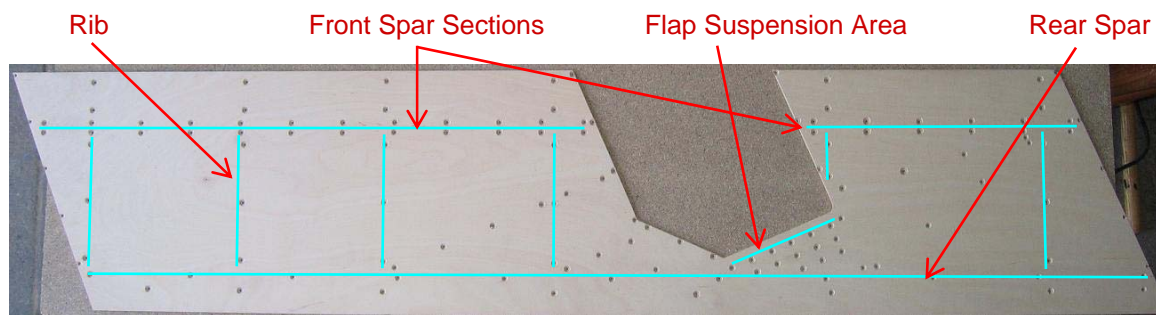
Flap bottom shell (lower side shown): structure layout
